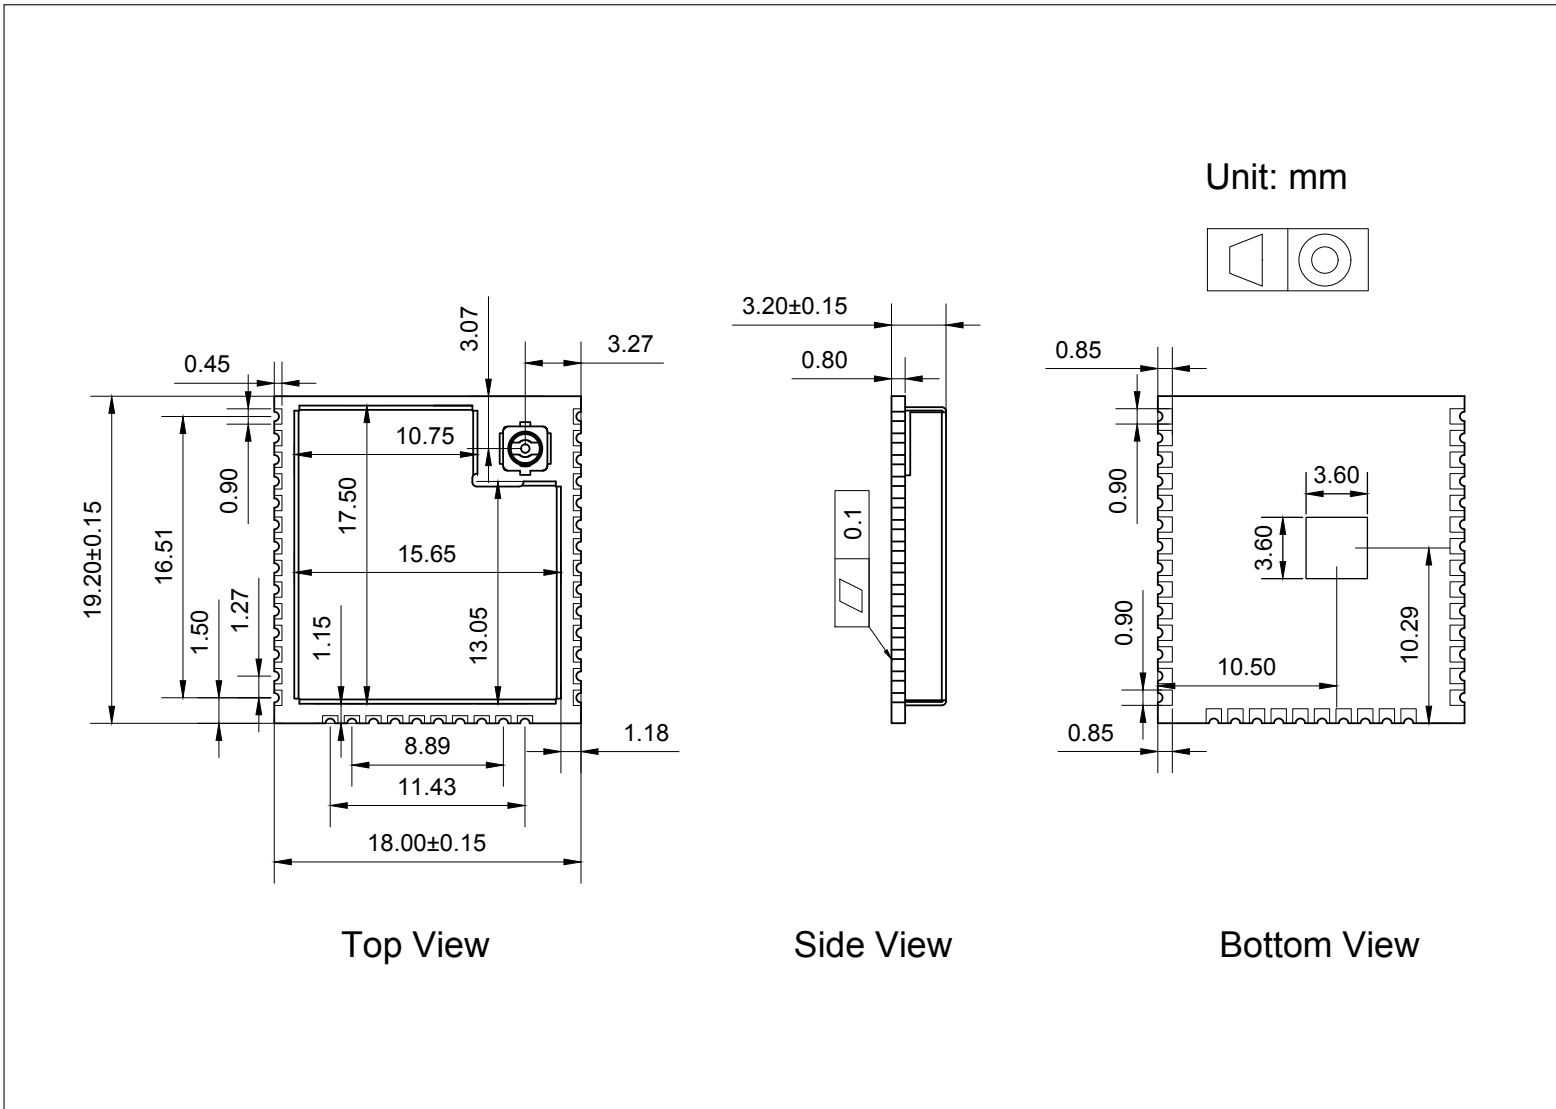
Physical Dimensions of ESP32-WROOM-32U
